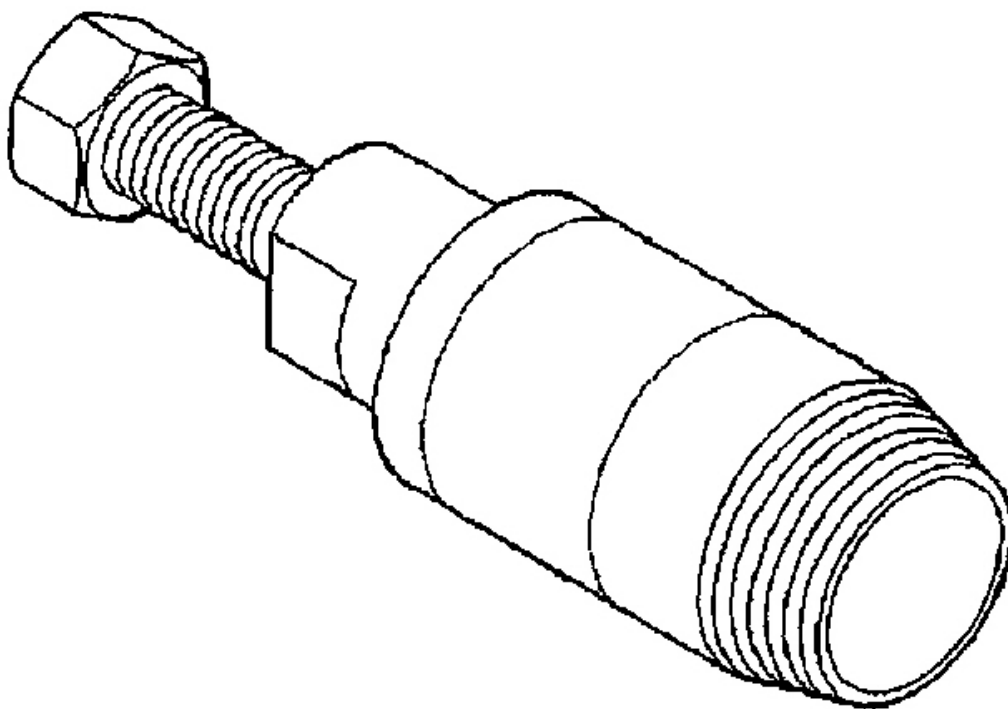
Identifying Crankshaft Sprocket Remover 6793
